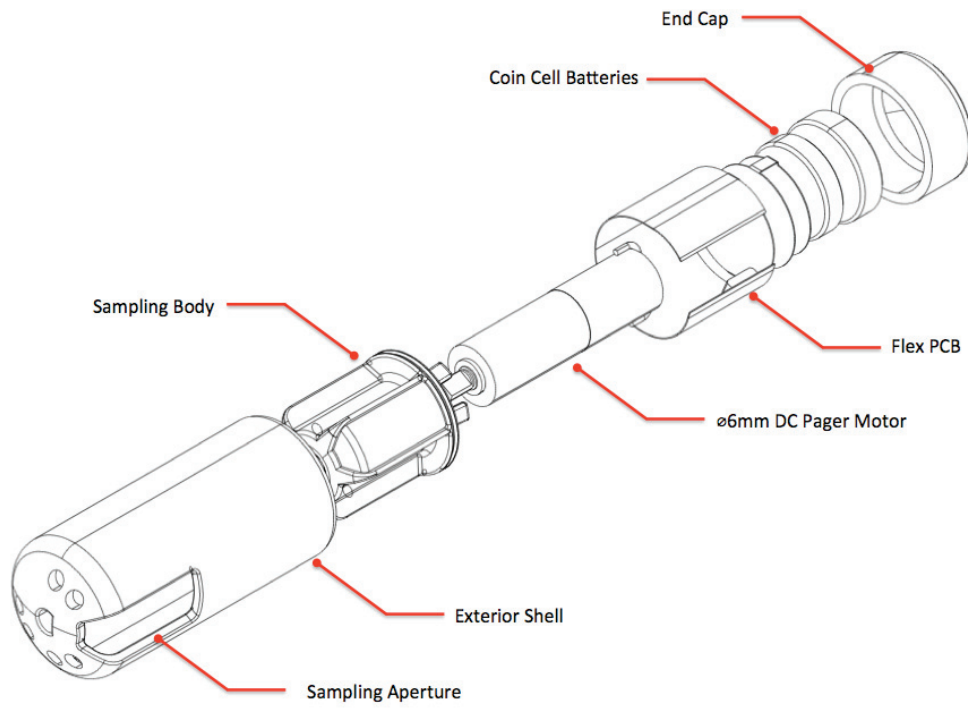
Exploded component view of GI sampling device (Embodiment B)
